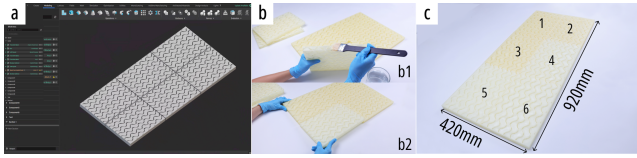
Assembly mold for mattress fabrication: (a) Design molds through our design tool; (b) Using a brush to moisten the mold surfaces along the seams and assembling the modular molds; (c) Waiting for the PVA molds to cure.
